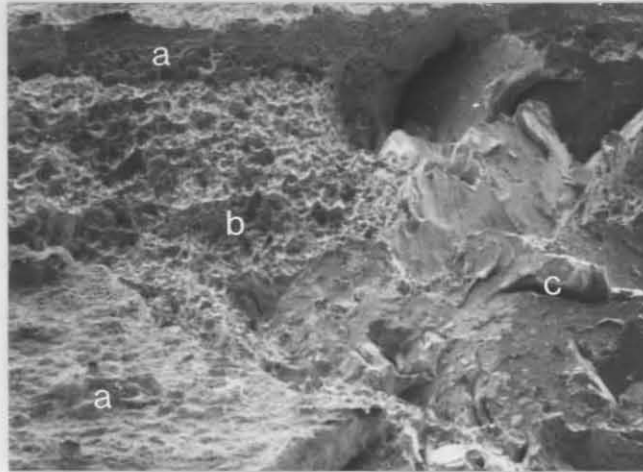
SEM fracture surface appearance of a bead-on-plate bent specimen; note ductile fracture in the weld metal (a) adjacent to the fusion line, ductile fracture in the HT HAZ (b) and cleavage fracture in the HT HAZ (c). The large cleavage facets resulted from the large grain size of the HT HAZ (100X).
